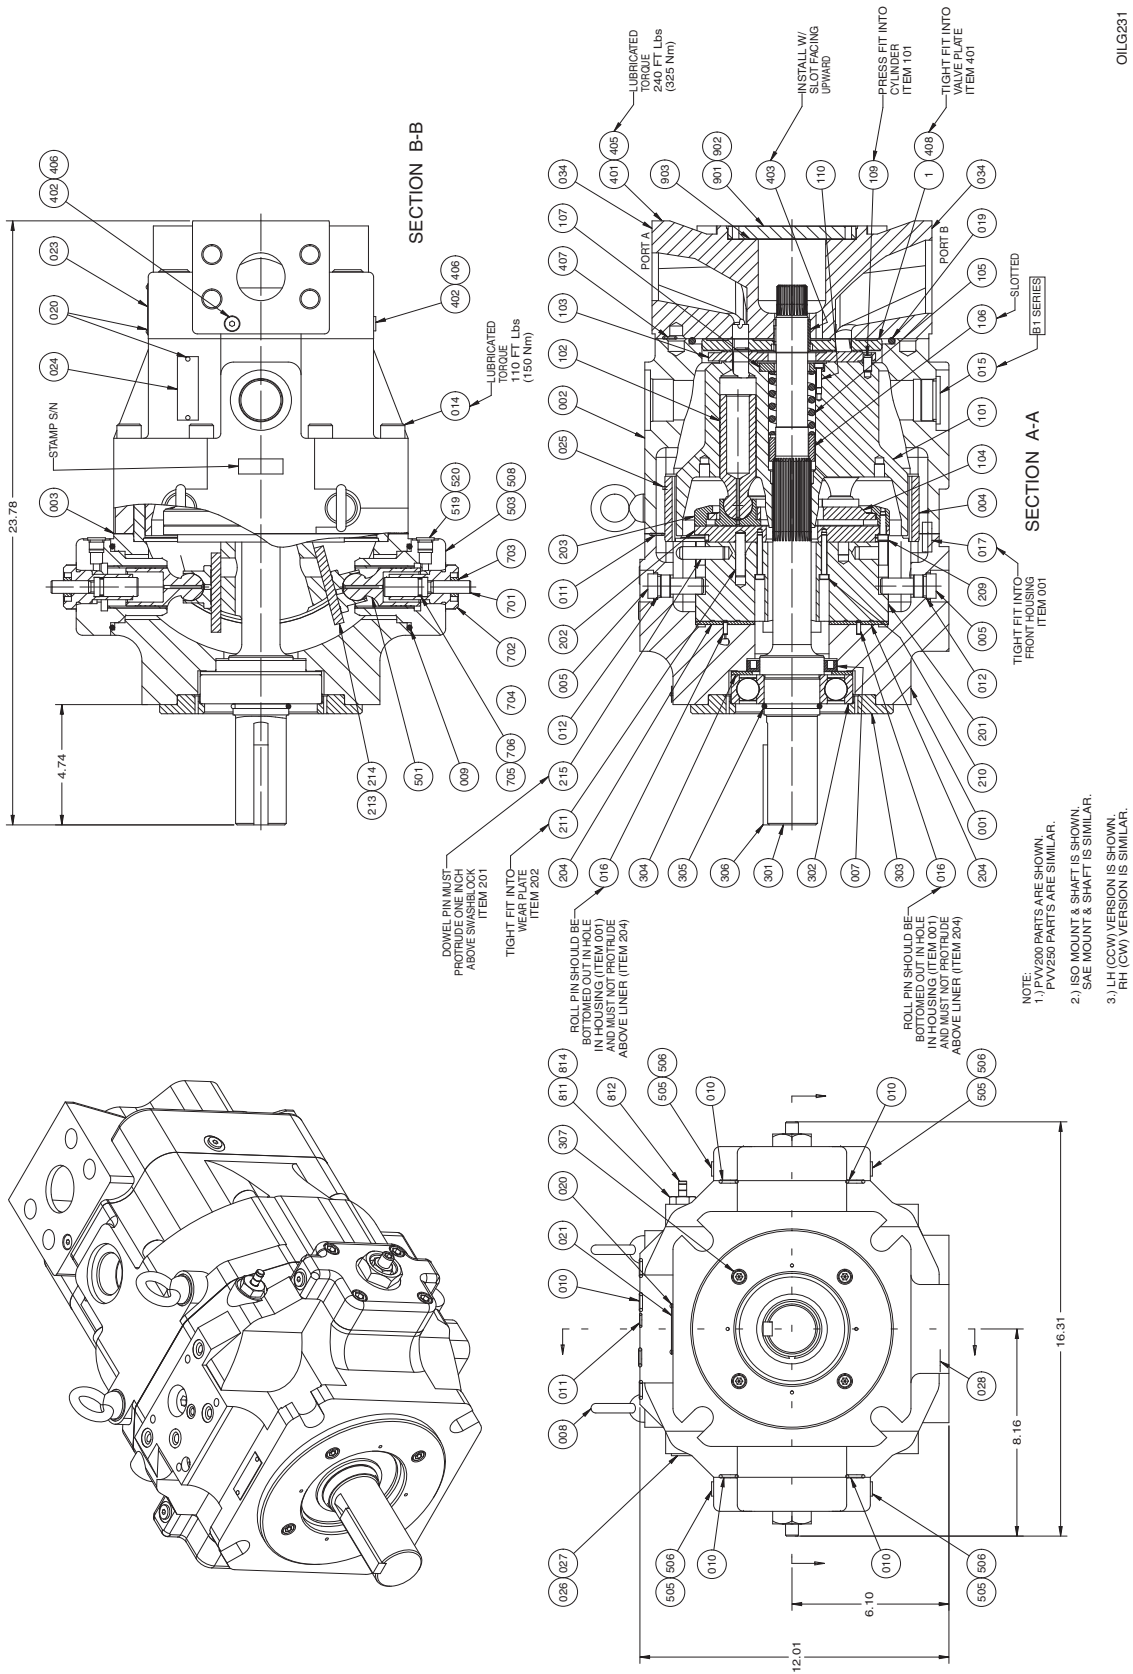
Exploded Parts Drawing for PVV-200/-250 B1 and B2
